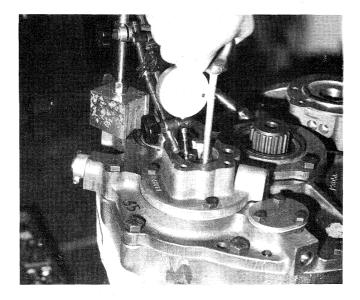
Applying pushing force while checking reverse clutch shaft end play.
